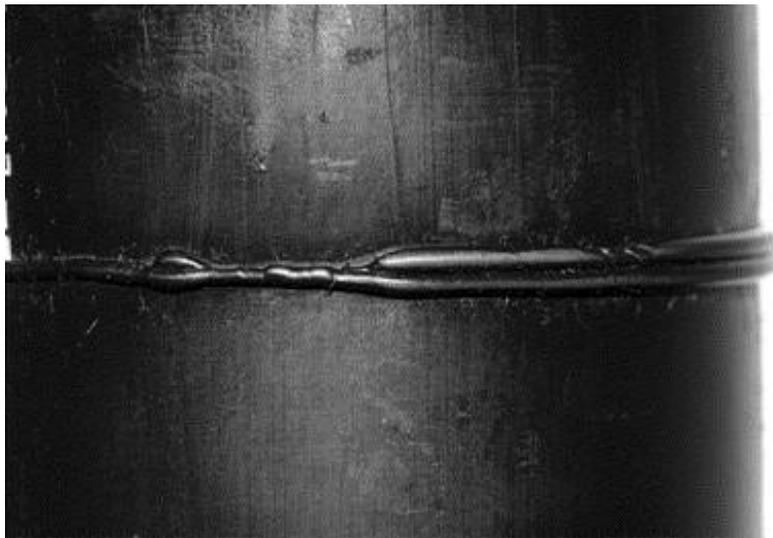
UNACCEPTABLE APPEARANCE – Incomplete Face-off
